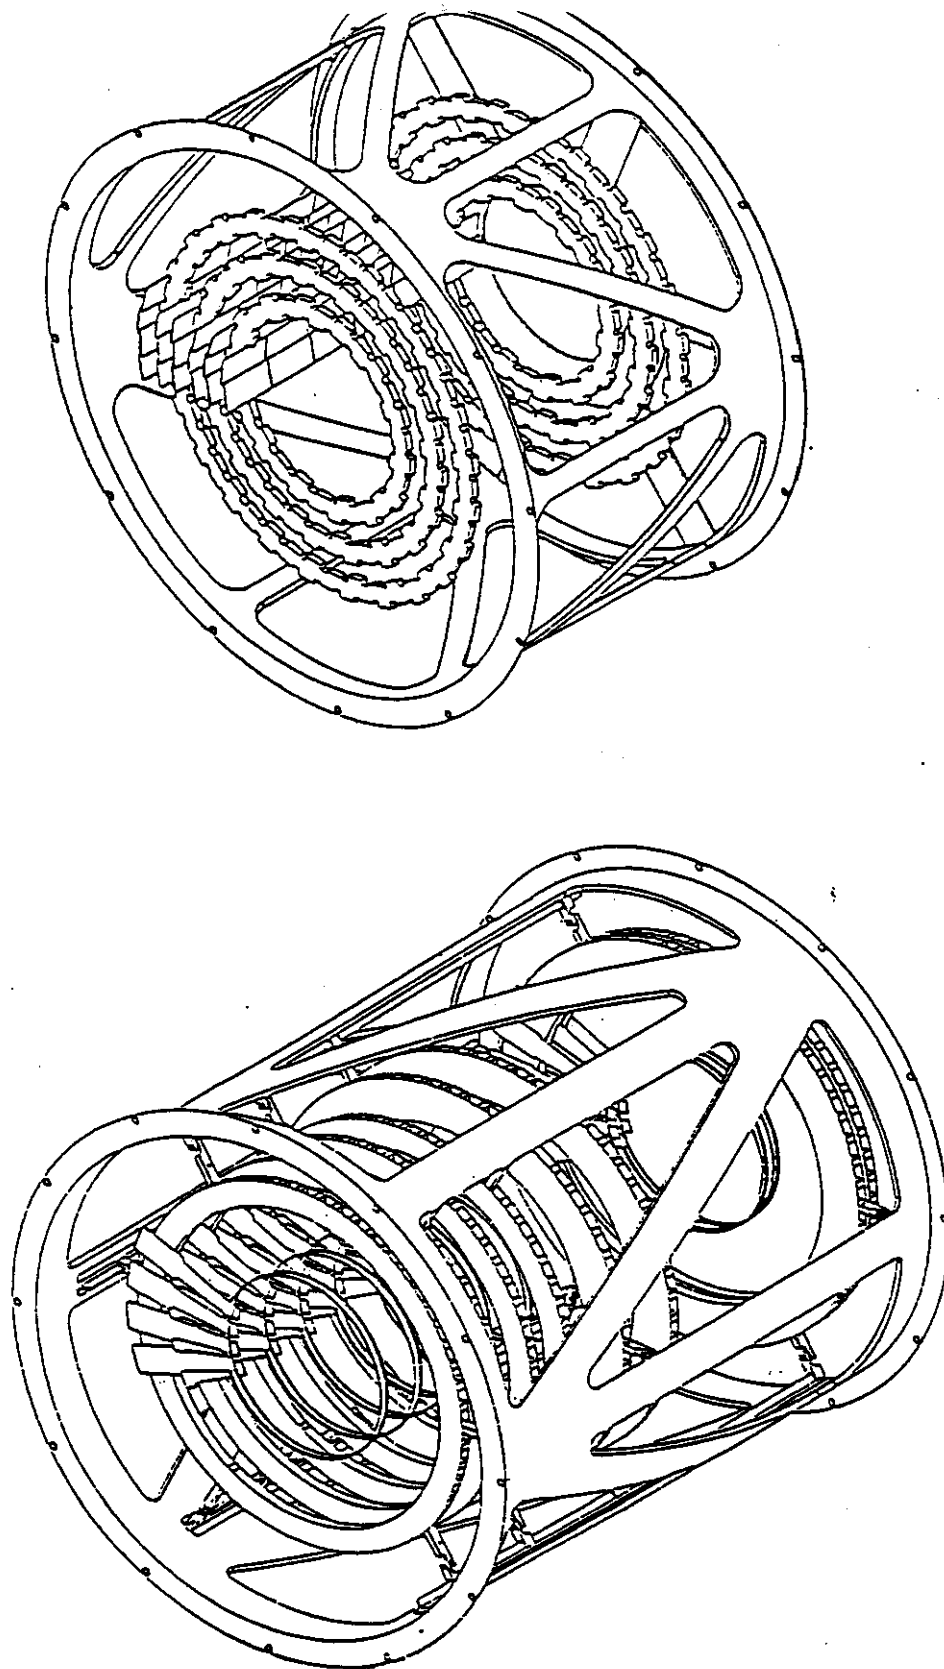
Isometric views of the silicon part of the 18° sector prototype for a) the barrel part and b) for the end cap part.
